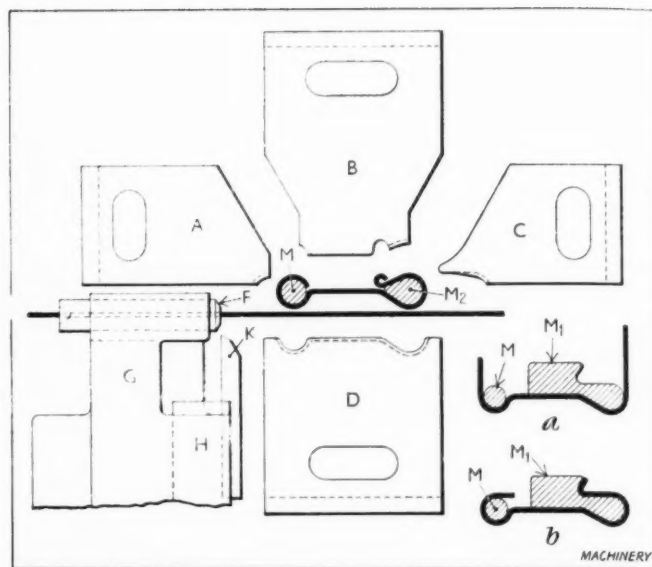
Four-slide Automatic Wire-forming Machine Set-up for Producing Hook *Y*, Fig. 1
